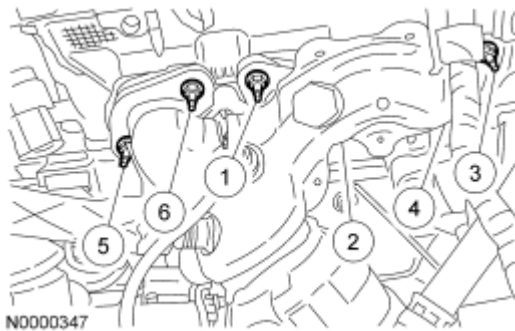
Identifying Tightening Sequence Of RH Exhaust Manifold Nuts
